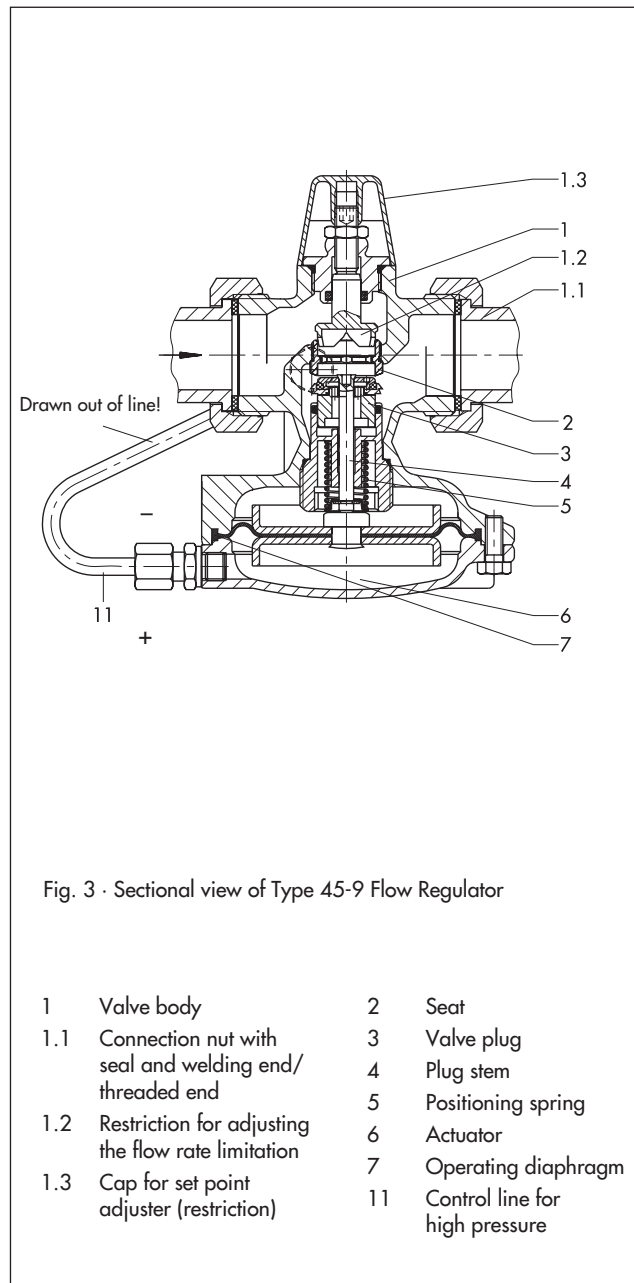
· Sectional view of Type 45-9 Flow Regulator
